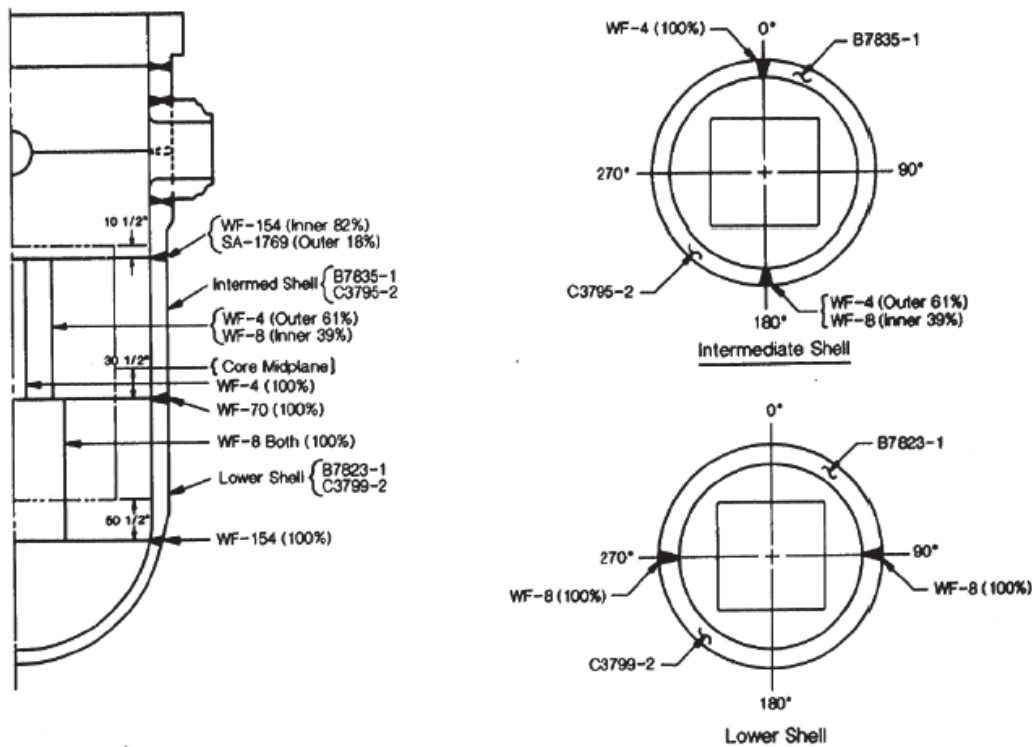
Location of materials (weld and base metal) used in the fabrication of the Zion Unit 1 beltline (intermediate shell to lower shell), two vertical welds above the beltline, and base metal heats [11].
